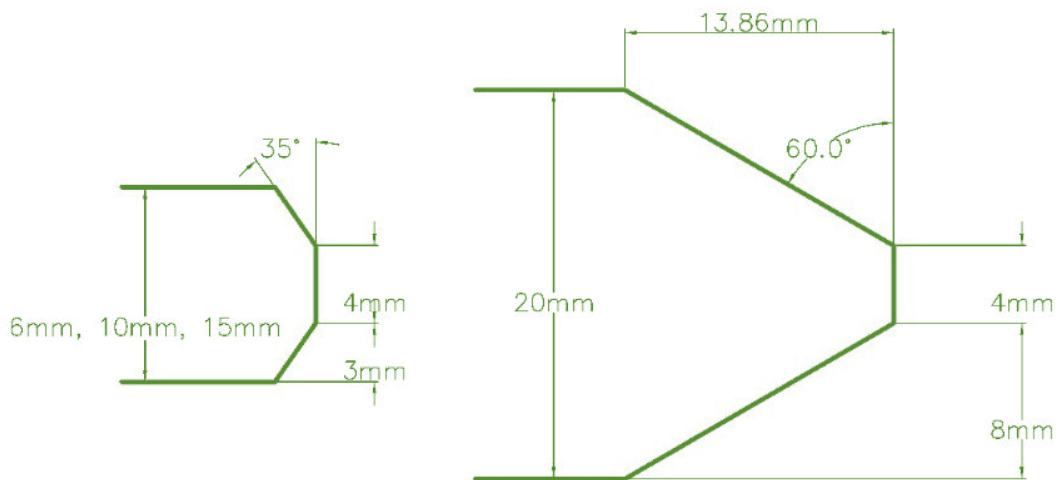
Weld details for butt weld specimens of various thicknesses.
